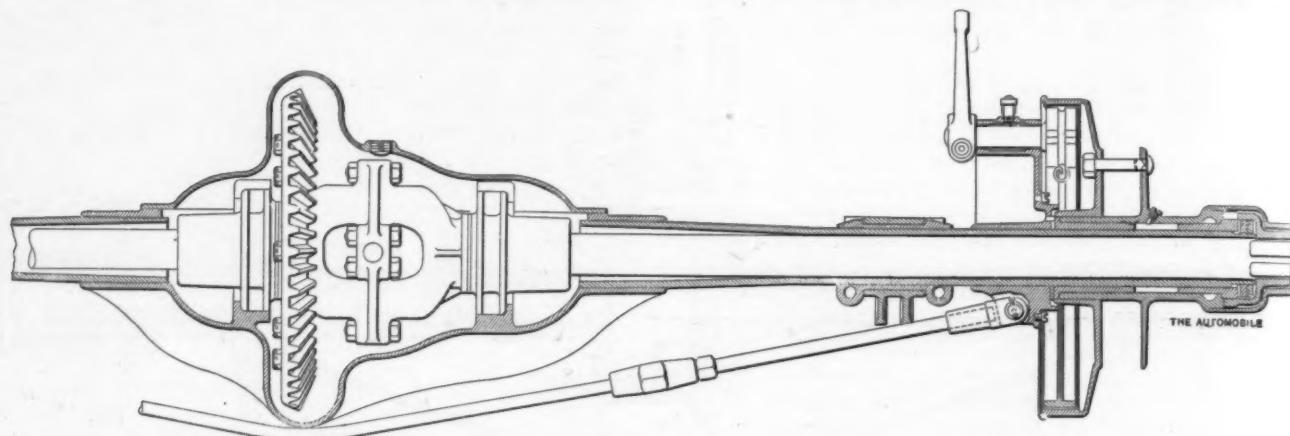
REAR AXLE WITH PLAIN BEARINGS, BEVEL GEAR DRIVE AND WHEELS RUNNING ON TUBES.
